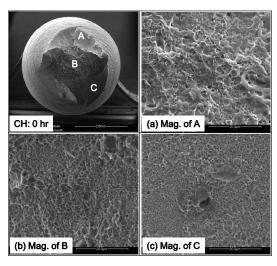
Fractured surface of 304L stainless steels without the hydrogen charging.
